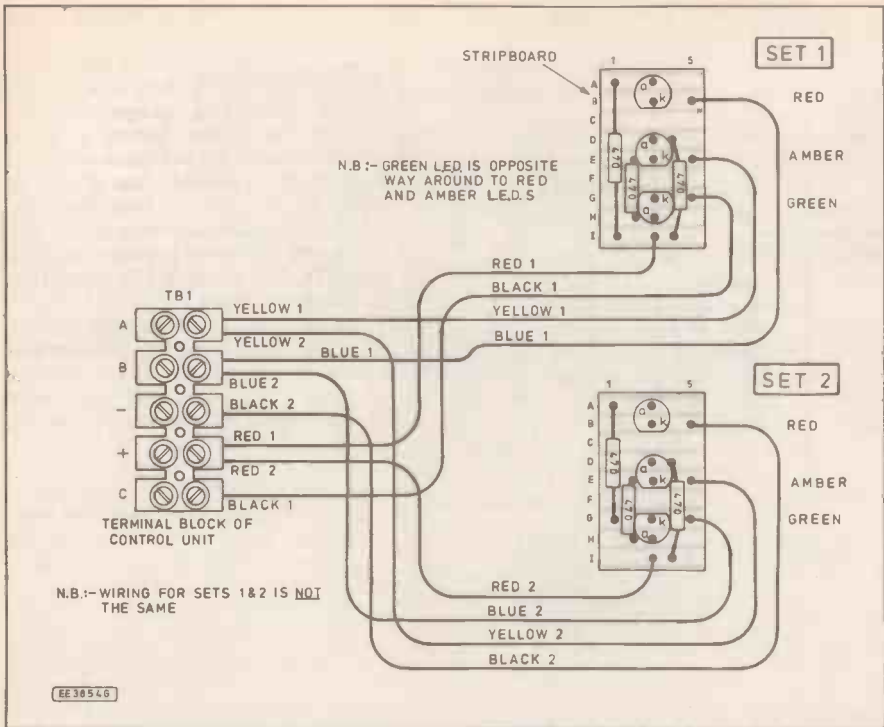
Wiring between the terminal block and l.e.d. boards.
